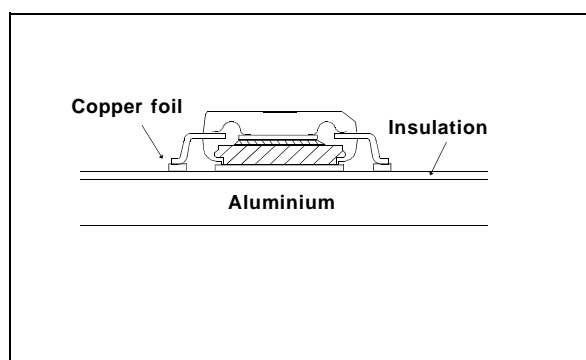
Mounting on metal backed board with an external heatsink applied
